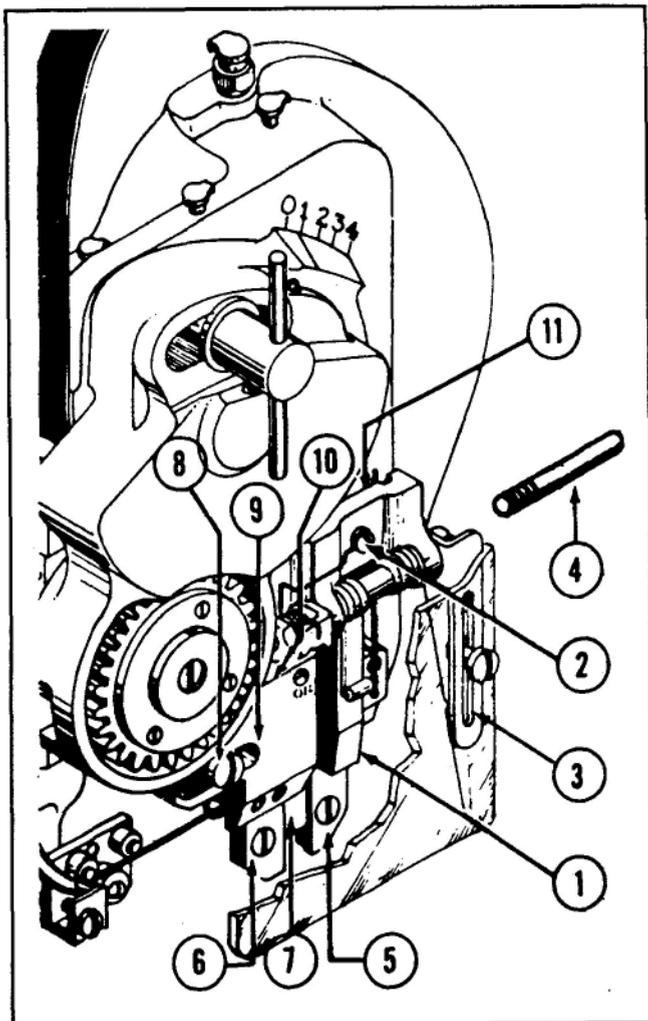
Removing and Replacing Gripper, Formers and Driver
